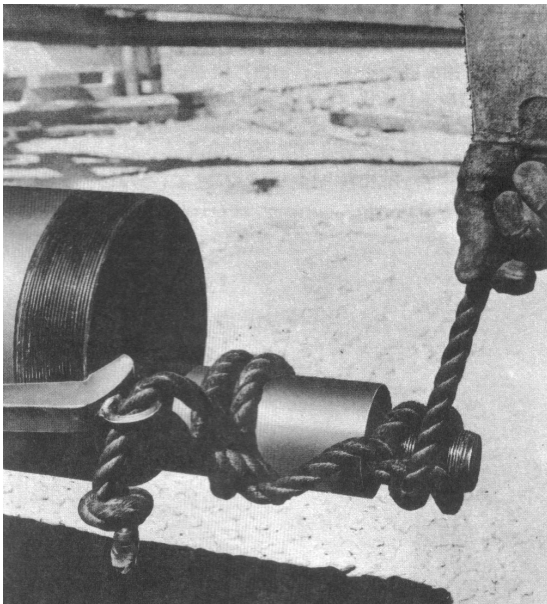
Preparing to lift column section with shaft and tube sections inside (the type of hoisting clamp will differ on pumps with flanged column).
